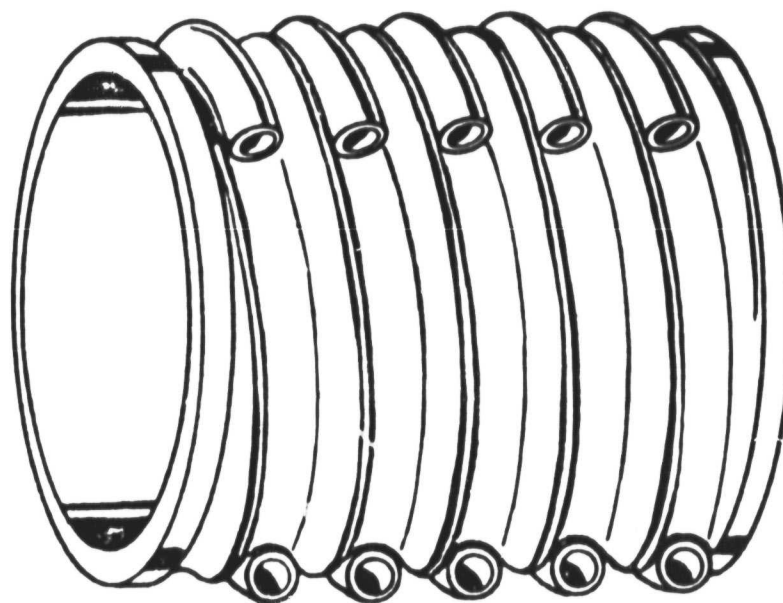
Schematic Arrangement of Mandrel for Winding Soft Extruded Tubing into a Helical Coil. The Mandrel would be Segmented to Permit its Removal
